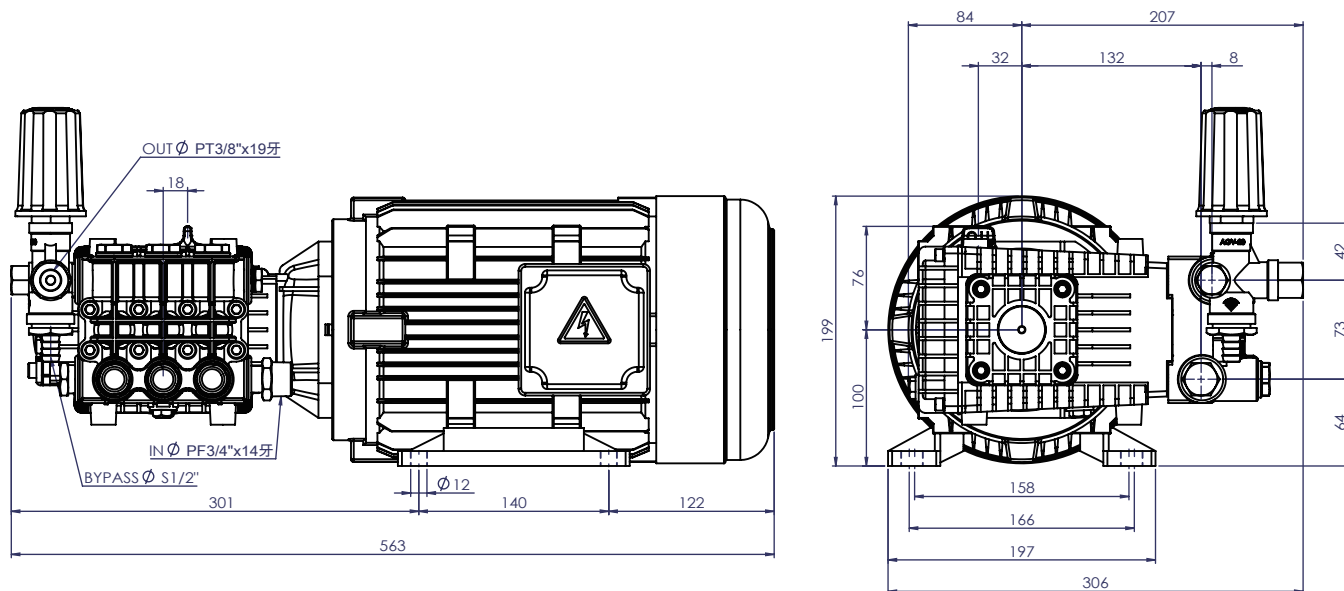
motor with overload protector. Die-casting aluminum. IE1 or IE3 are available.
